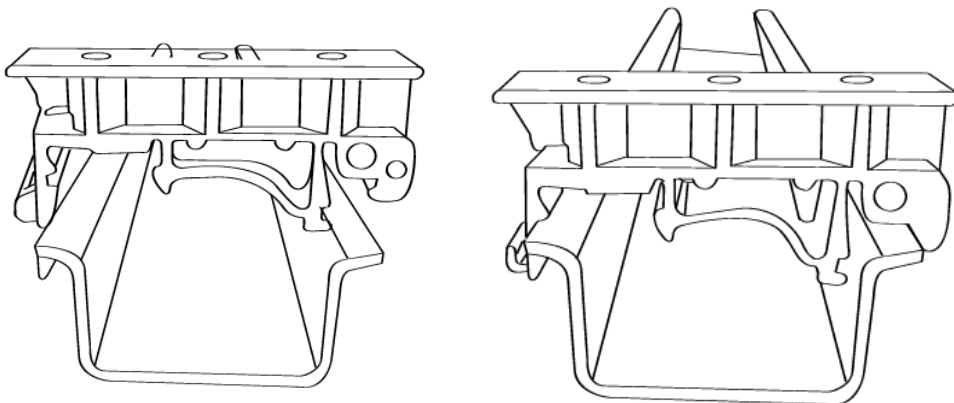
Installing DIN Rail mount kit into DIN Rail
